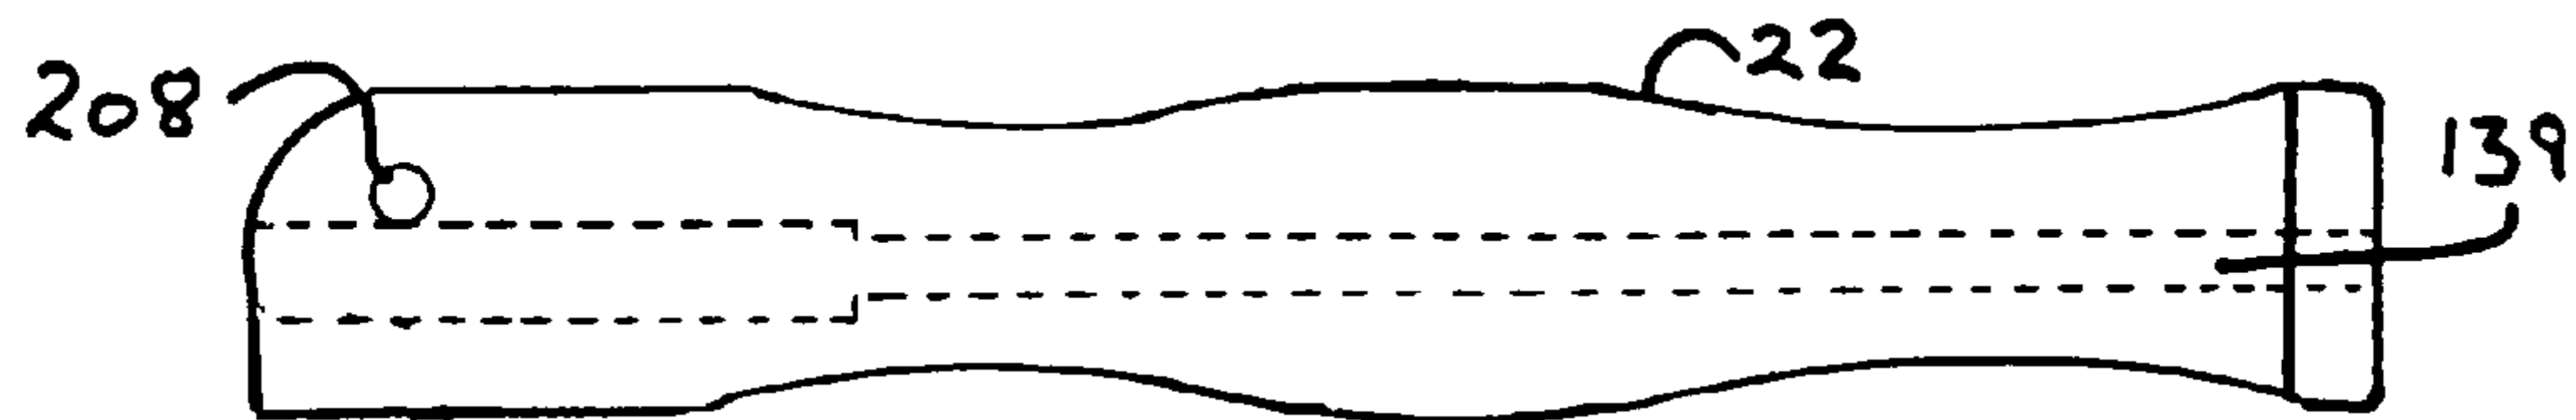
Side sole view of *swivel handle 22* and its composition sans its components.
